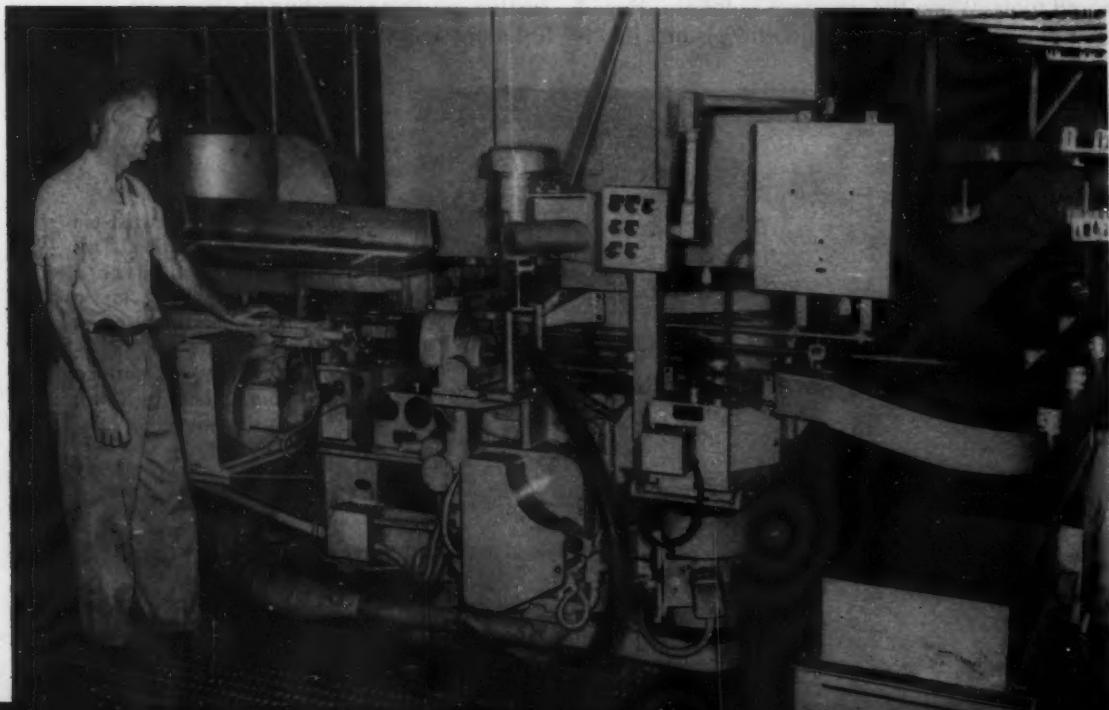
One piston is being oriented at (M) on the weighing machine. Another is resting on a scale platform at (O), after which it will be milled to the proper weight and the dome boss removed.
